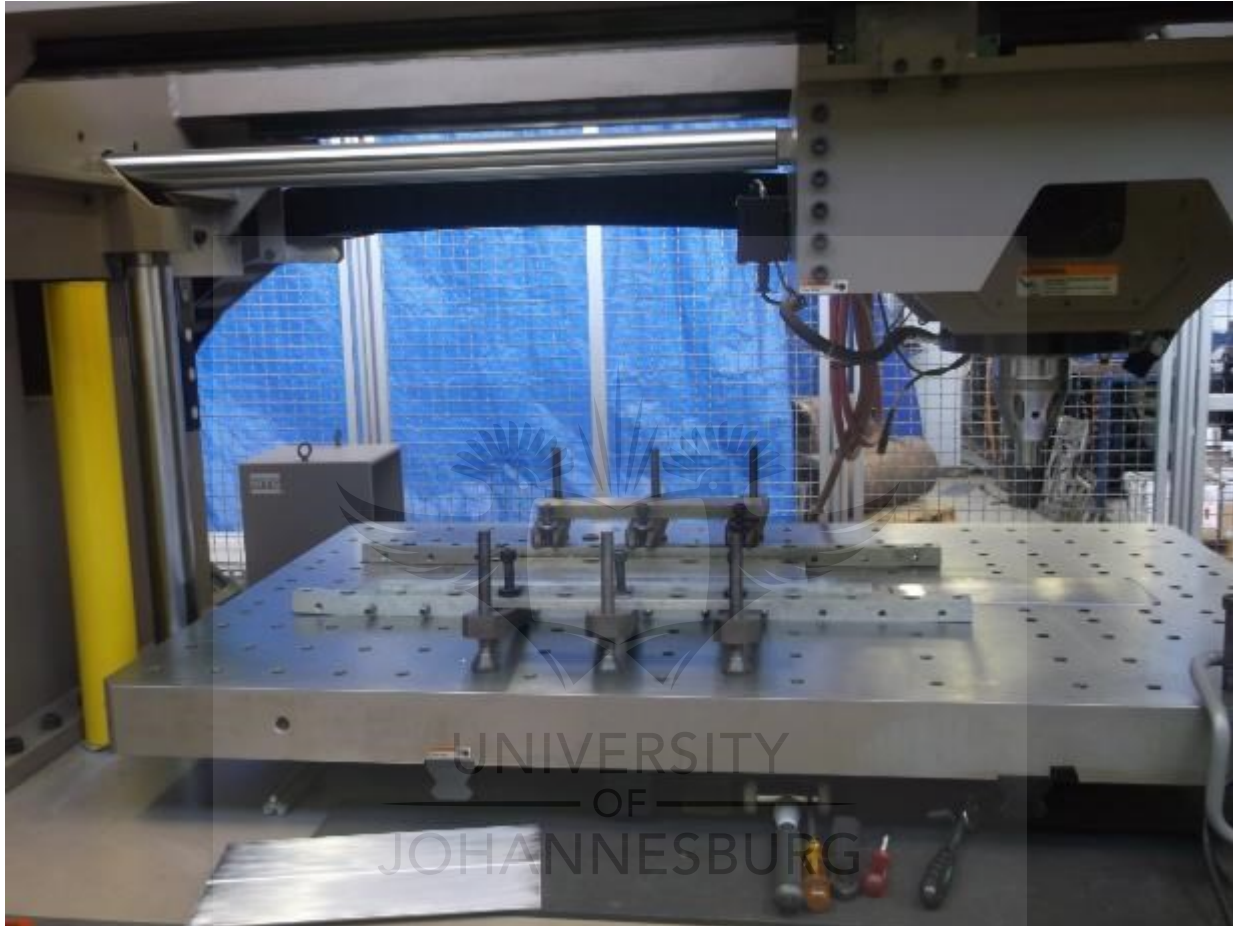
MTS PDS I-Stir FSW machine used to produce the Friction Stir Spot Welds
